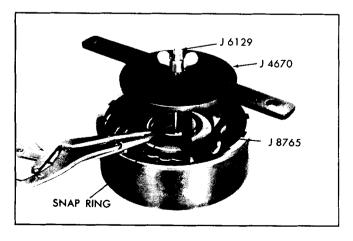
E-127 Removing or Installing Clutch Piston Snap Ring
